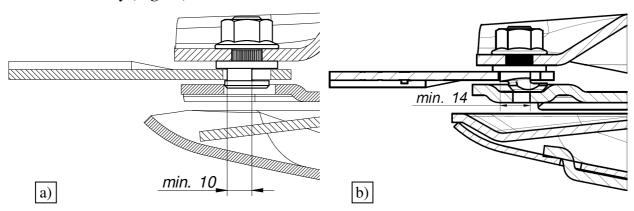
Permissible wear of knife holder pin on disk a) knife base M12 b) knife base M12 with claw
